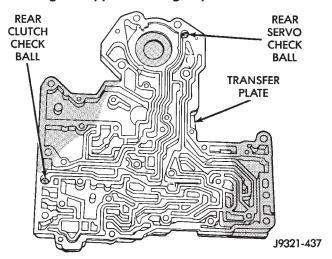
Rear Clutch And Rear Servo Check Ball Locations
